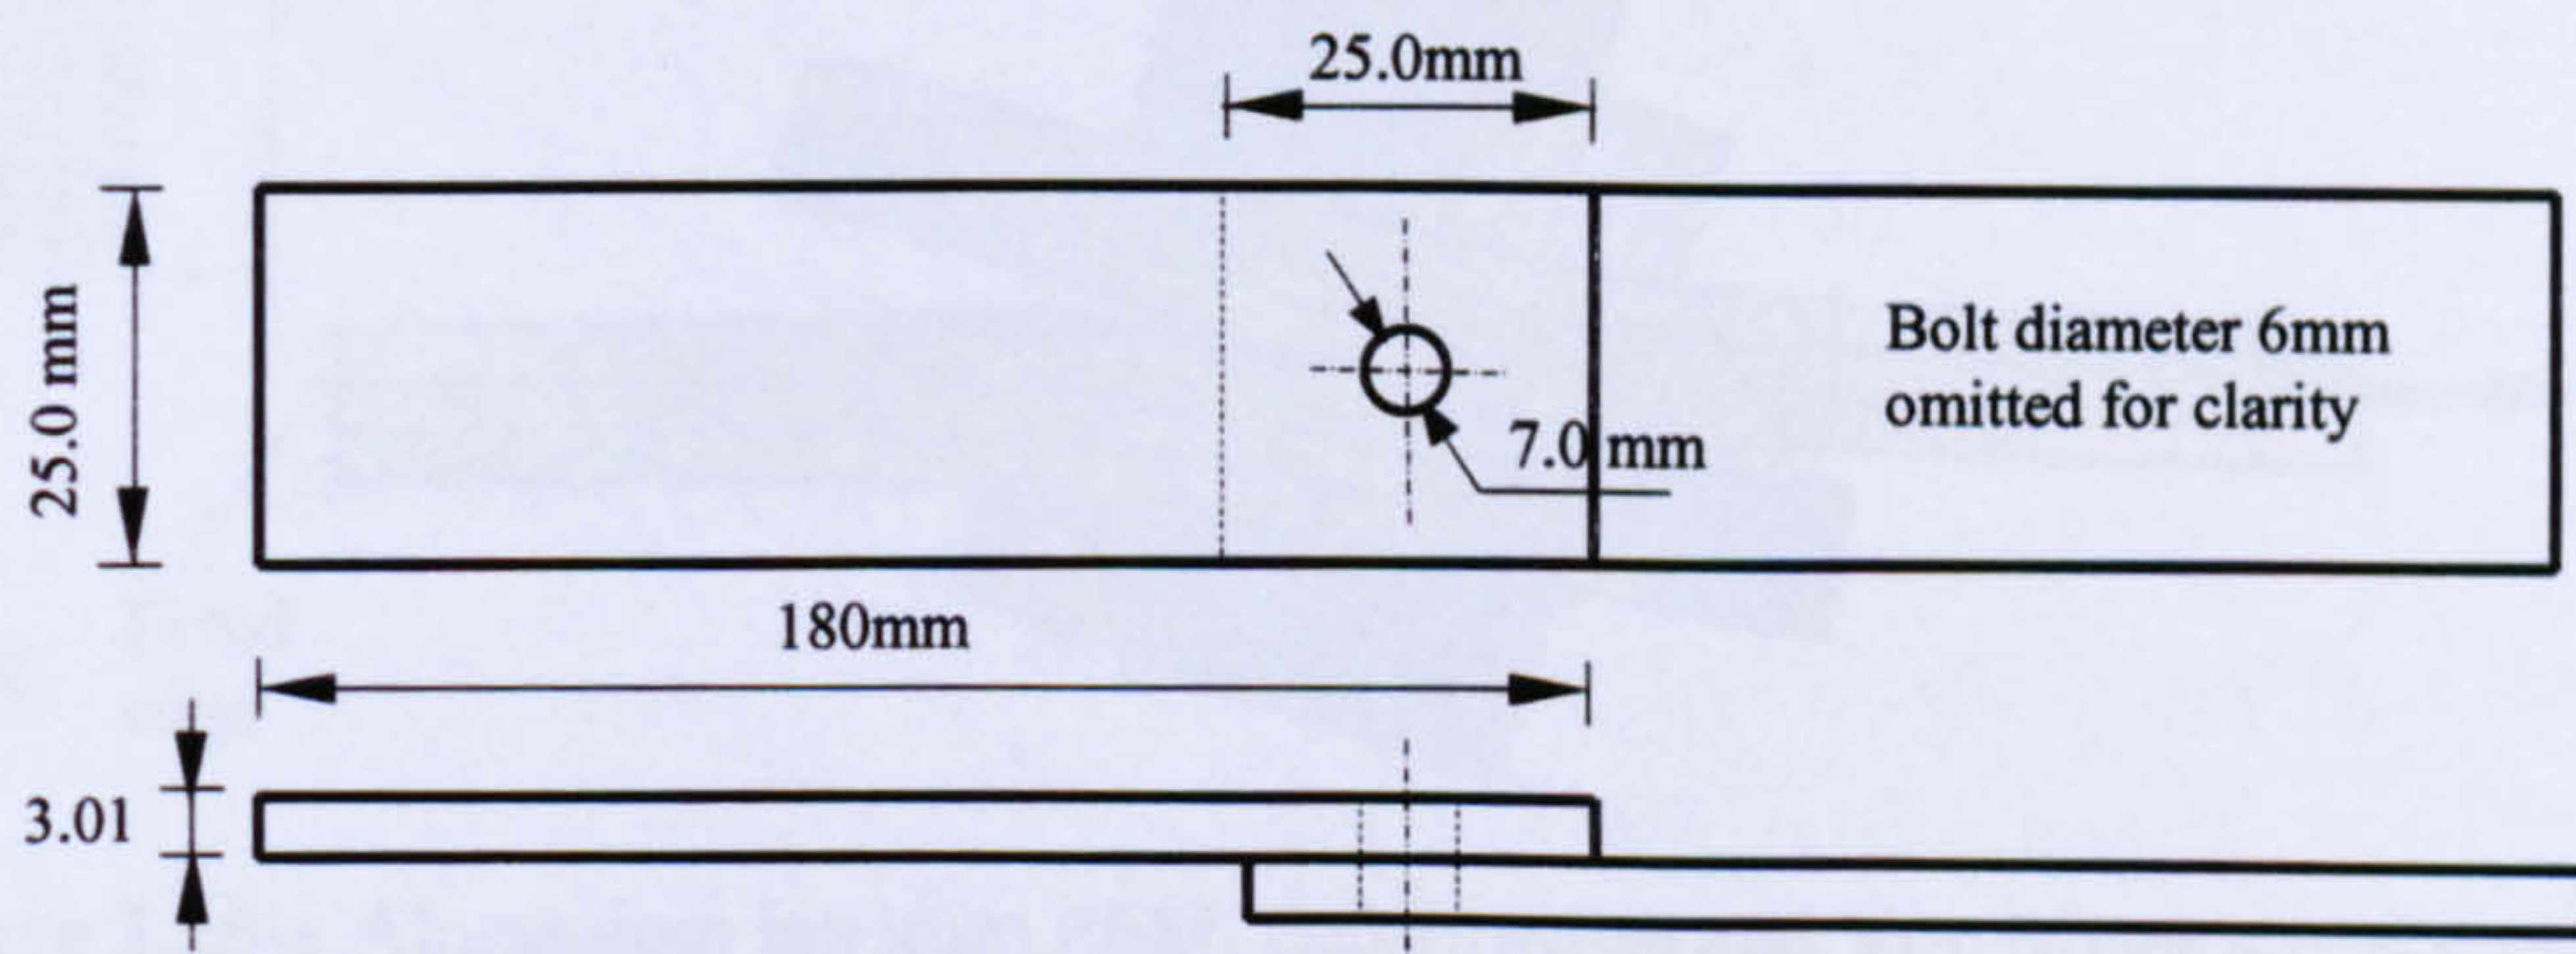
Geometrical details of Aluminium lap joint test specimen
